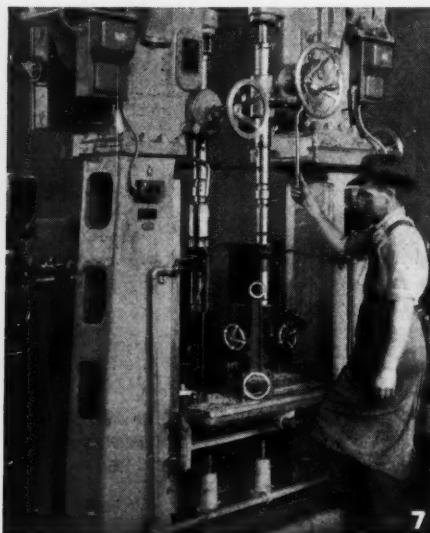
A later type of Barnes drill which finishes a tractor rod complete in  $4\frac{1}{2}$  minutes.
